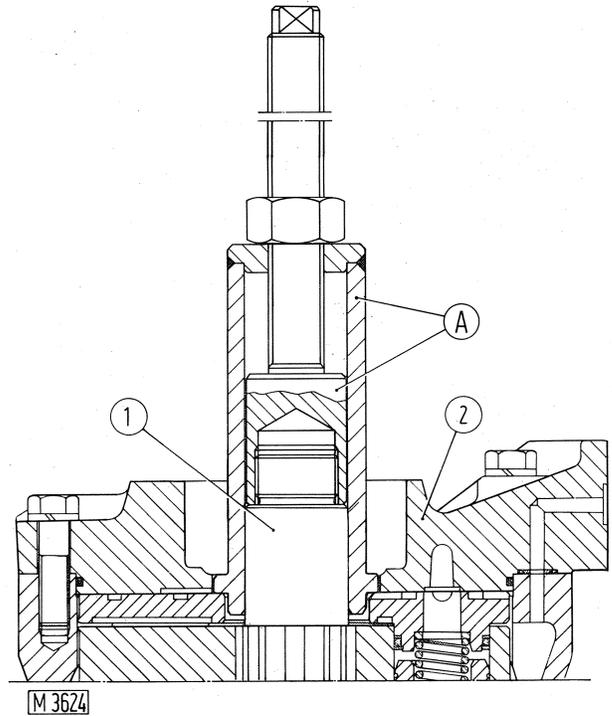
Schematic assembly of timing plate and rear end plate using press 75296078 (A).
